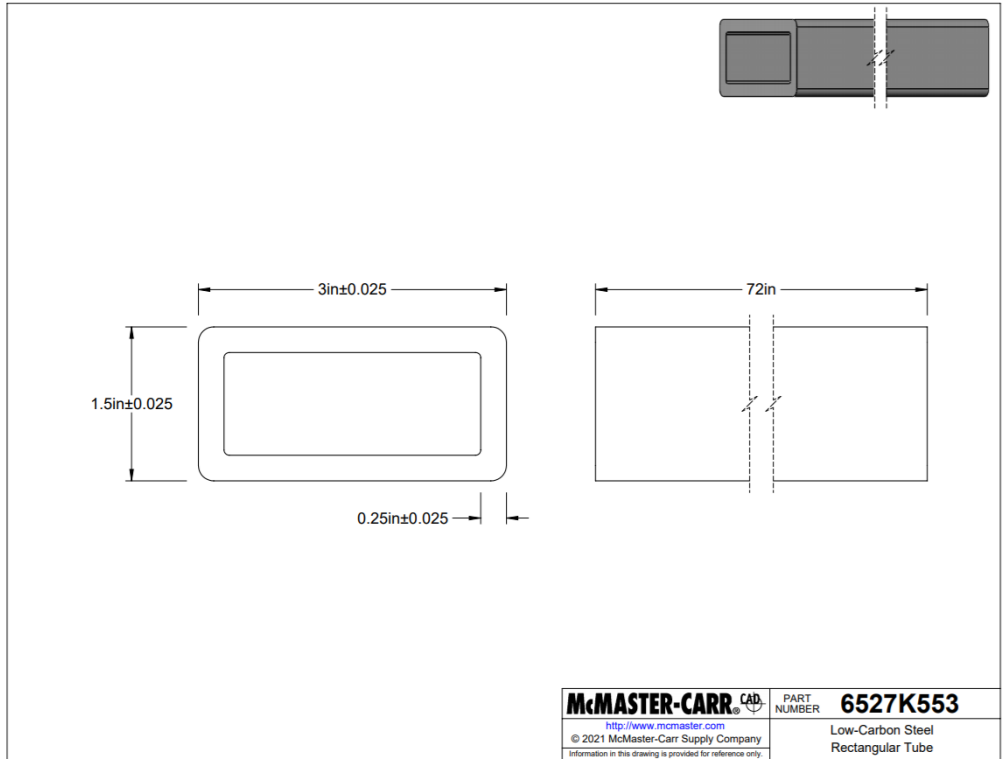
Drawing of Low-Carbon Steel Rectangular Tube Used on Fly Section Provided by McMaster-Carr
